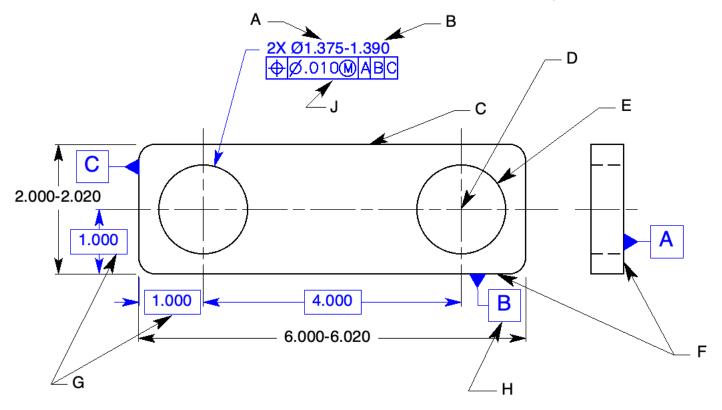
Geometric dimensioning and tolerancing terms: Prob. 2.
